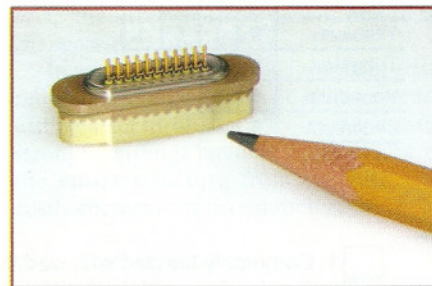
The wavy weld line on this electronic component reveals that it was machined from an explosively welded block (6061 aluminum to 4047 aluminum).
